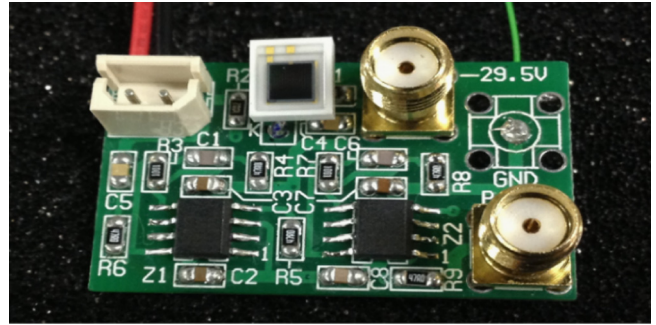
Picture of readout electronics built for 1 × 1 mm², 3 × 3 mm² SiPM prototype: 40(W) × 20(L) mm.
